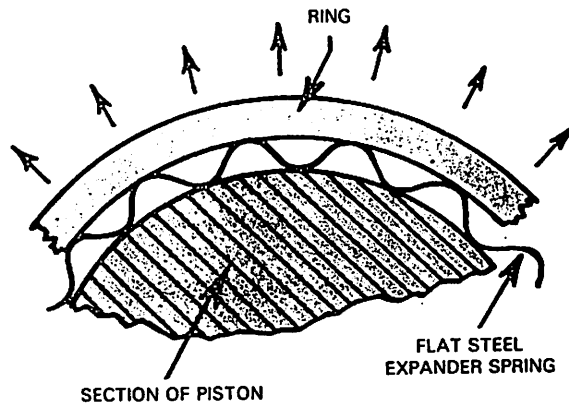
Spring expander rests on bottom of ring groove and forces ring outward. This pressure will keep ring in constant contact with cylinder wall.
